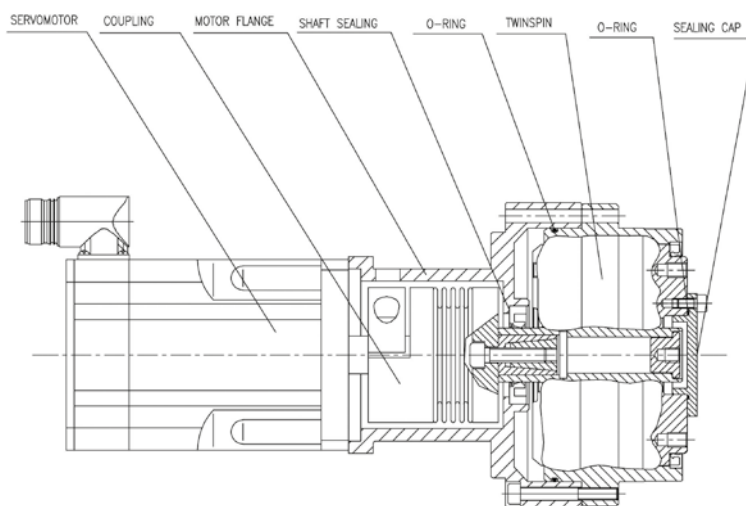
Connection of motor with reduction gear with flexible coupling
